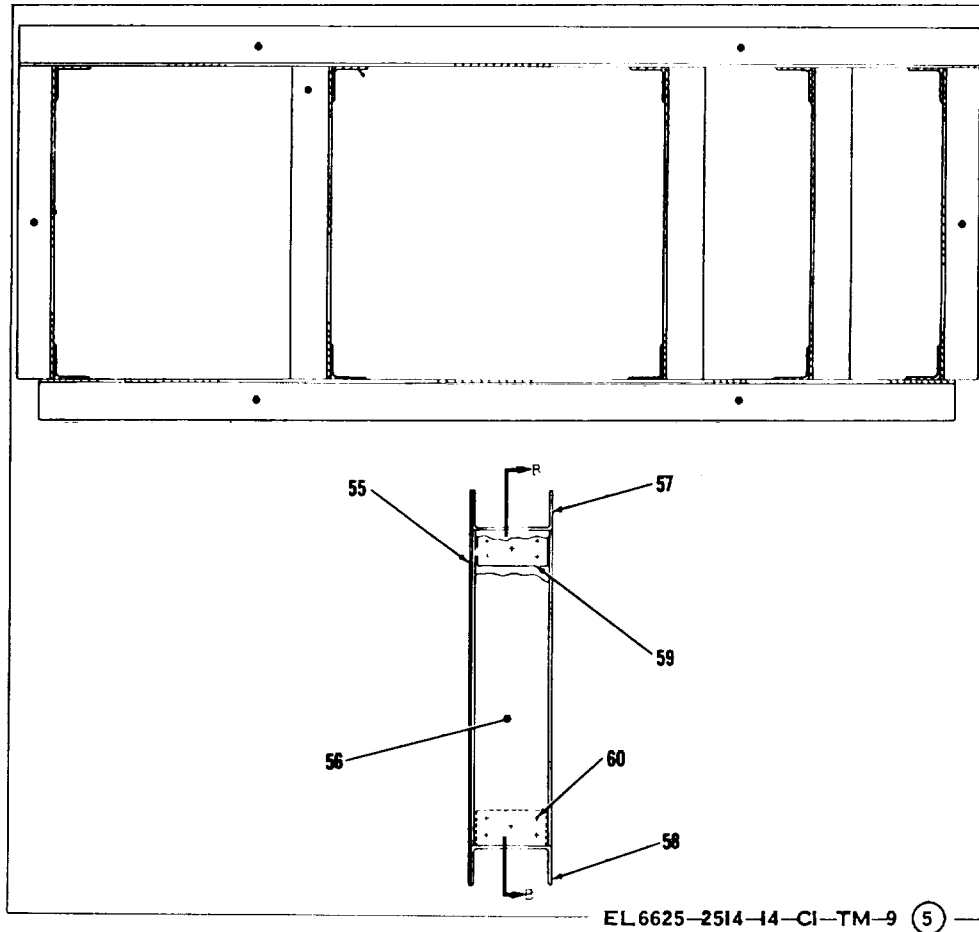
(5). U70662 chassis assembly (sheet 5 of 5).
